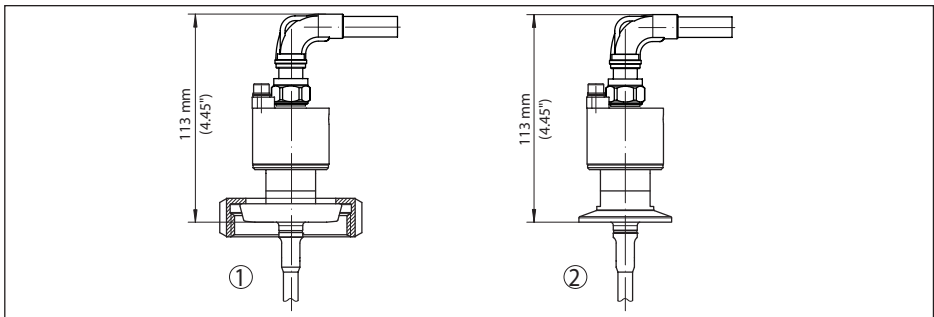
Sensor housing VEGAFLEX 83 - polished
